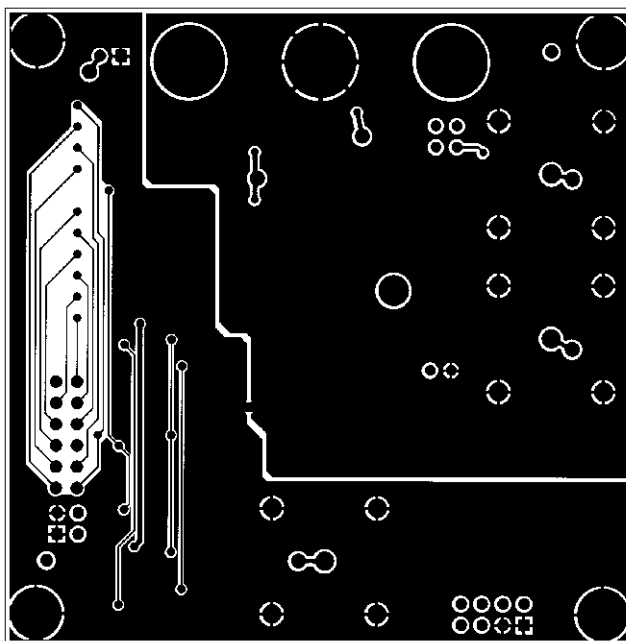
Suggested Evaluation Circuit Board Solder Side Layout
